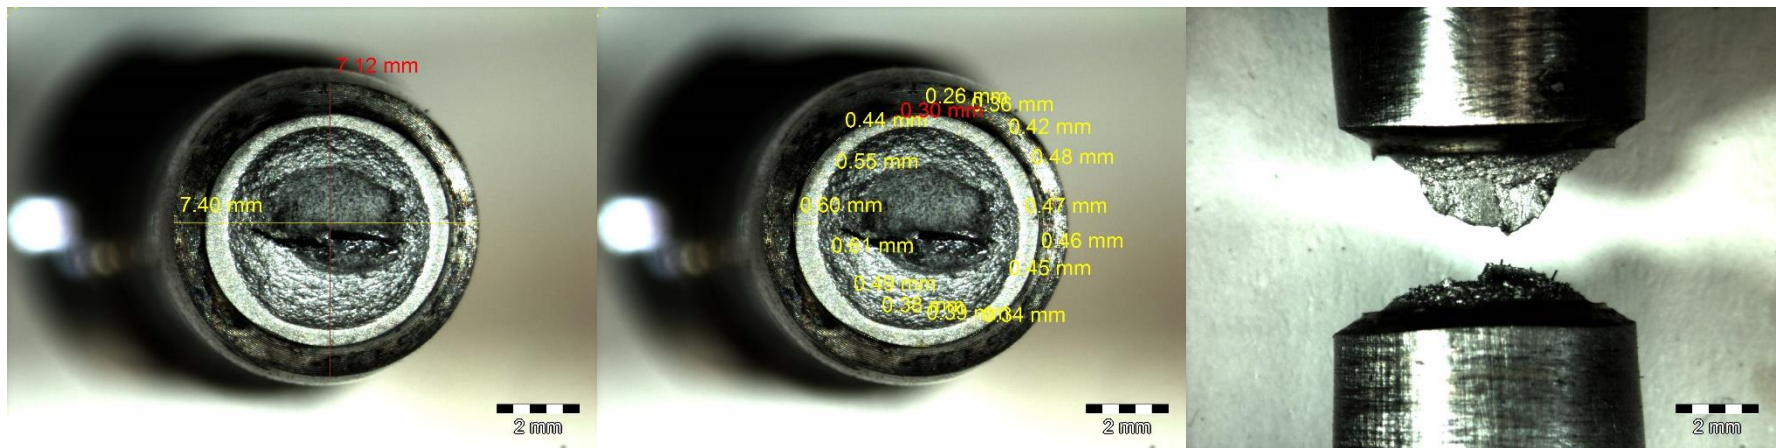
Cross-sectional and side view of fractured StxWSCCRB-03
